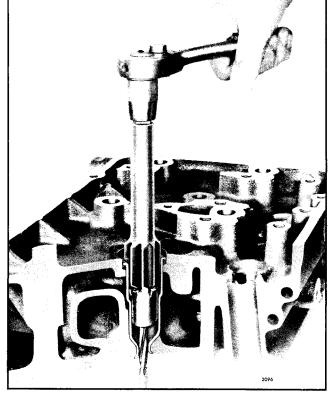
Reaming Injector Tube for Injector Body Nut and Spray Tip using Tool J 22525-1
